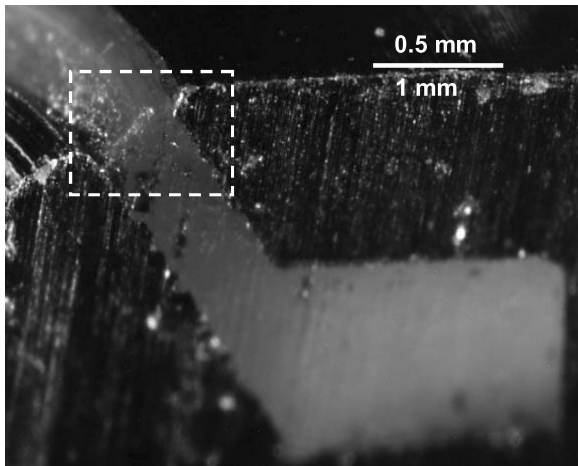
Sectioned RPOV pilot seat assembly, seal recession (boxed region) after valve-level acceptance testing; seal has receded into the cavity by approximately 0.050 mm (0.002 in.).
